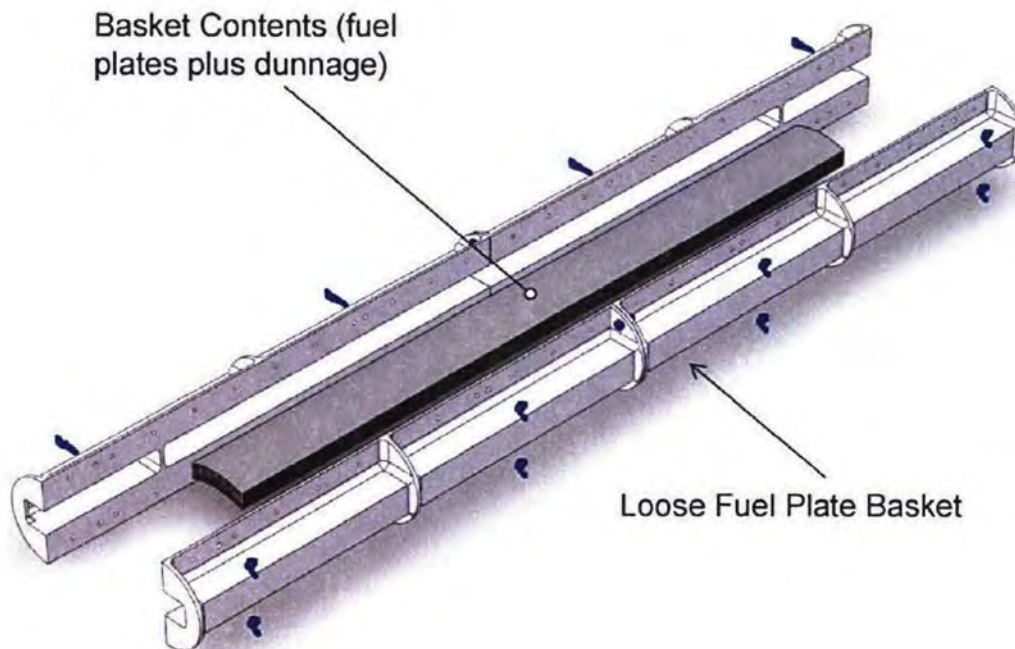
Loose Fuel Plate Basket – Exploded View
